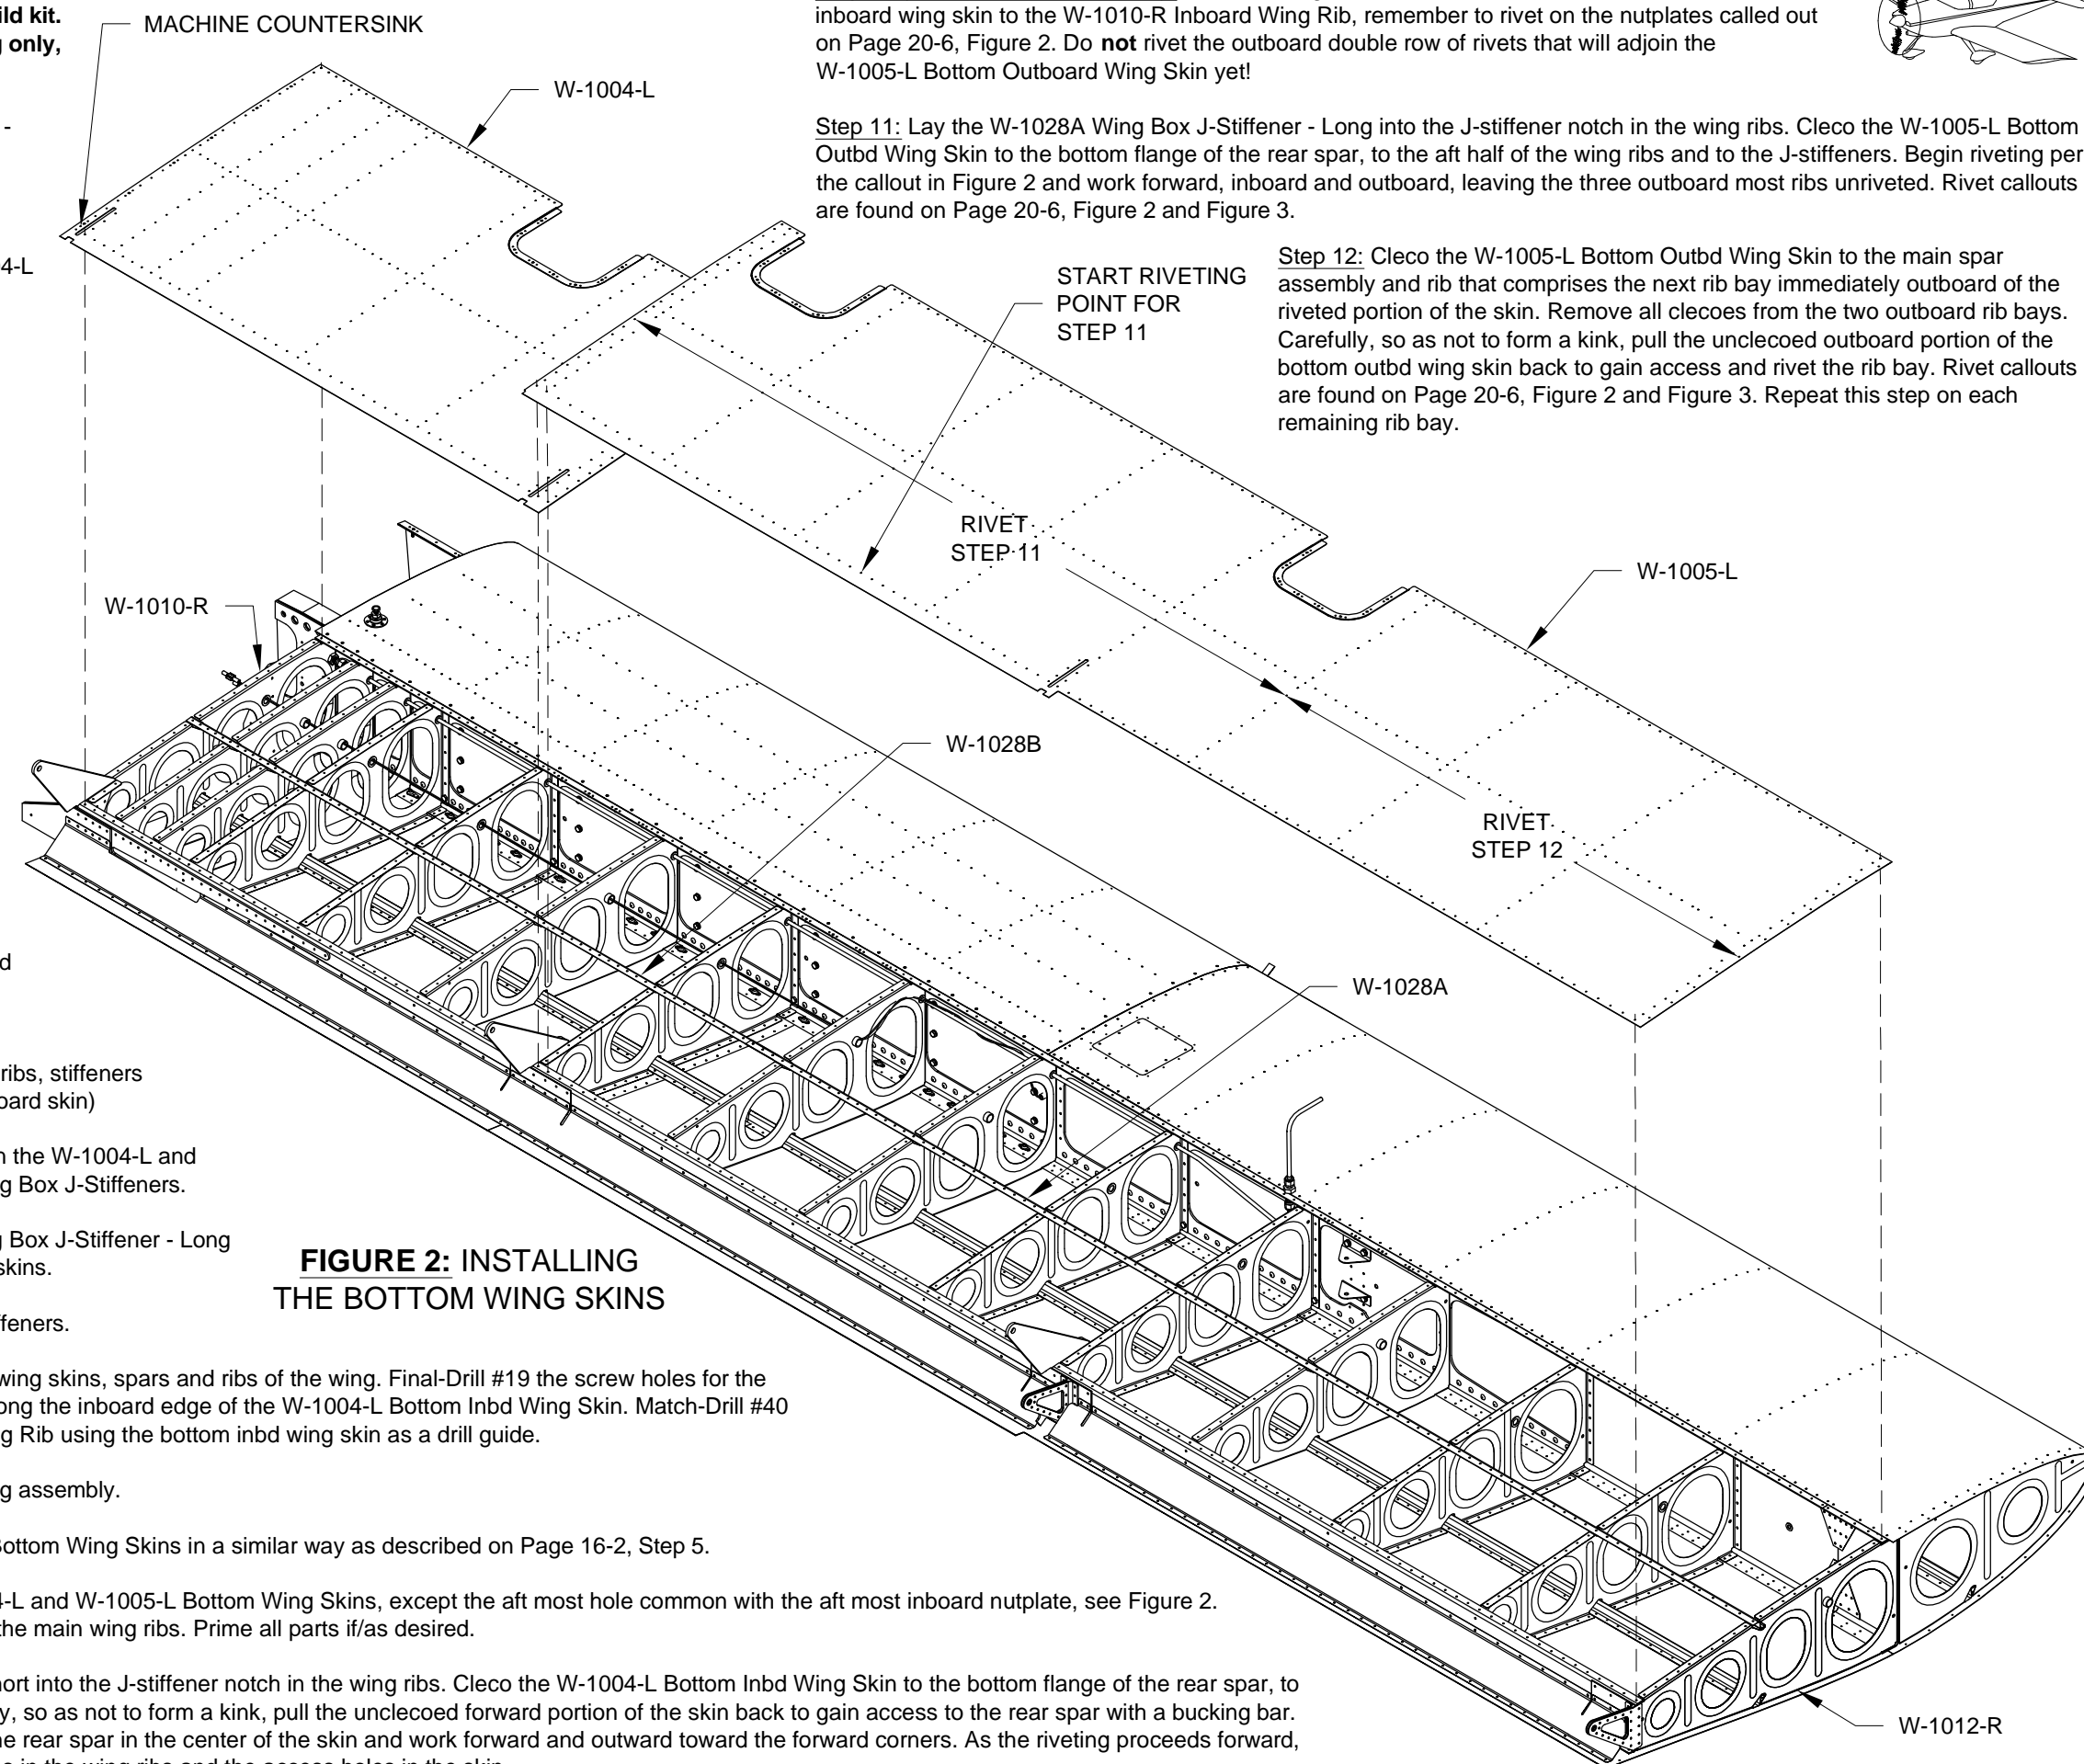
INSTALLING THE BOTTOM WING SKINS
